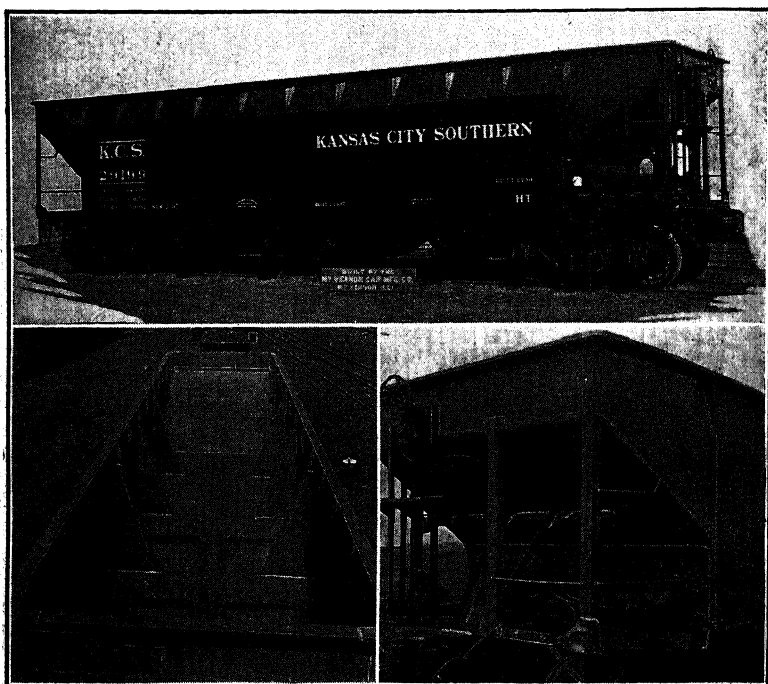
Top: 70-ton, quadruple hopper car weighing 54,000 lbs. The manufacturer builds between three and six cars per day. Lower left: Interior view showing smooth surfaces devoid of rust pockets. Lower right: End view of hopper car.
